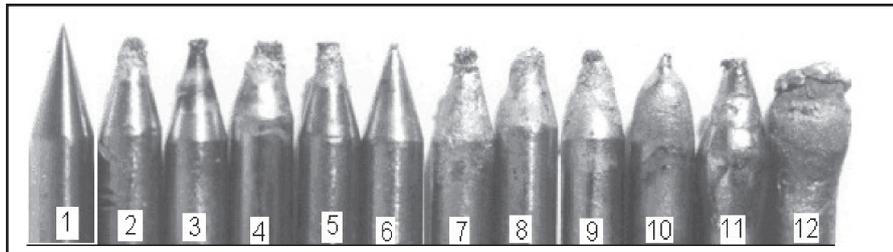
Electrode wear; 1 — before welding, 2–12 — after welding.
